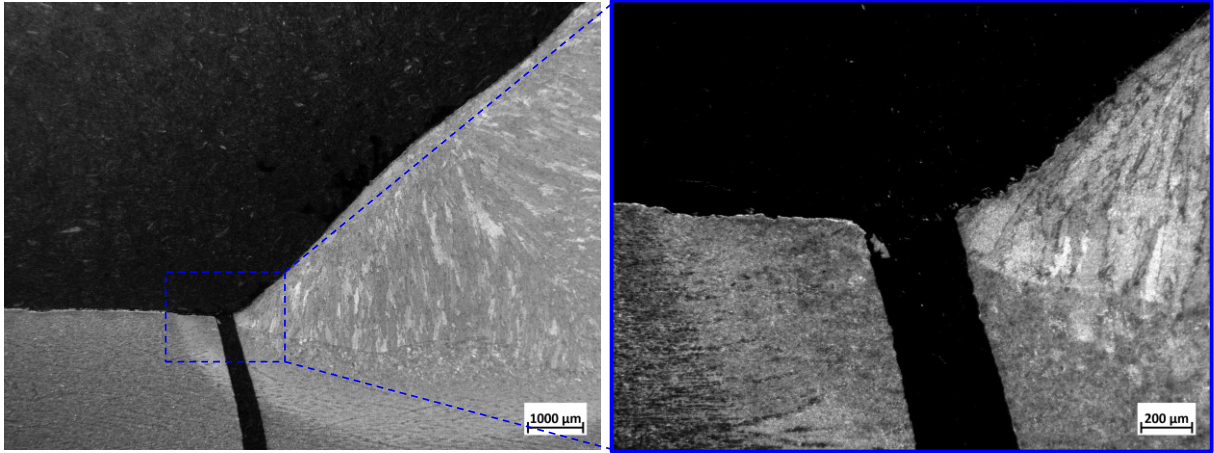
Crack propagation plane in the nearby of the weld toe where it initiated.
